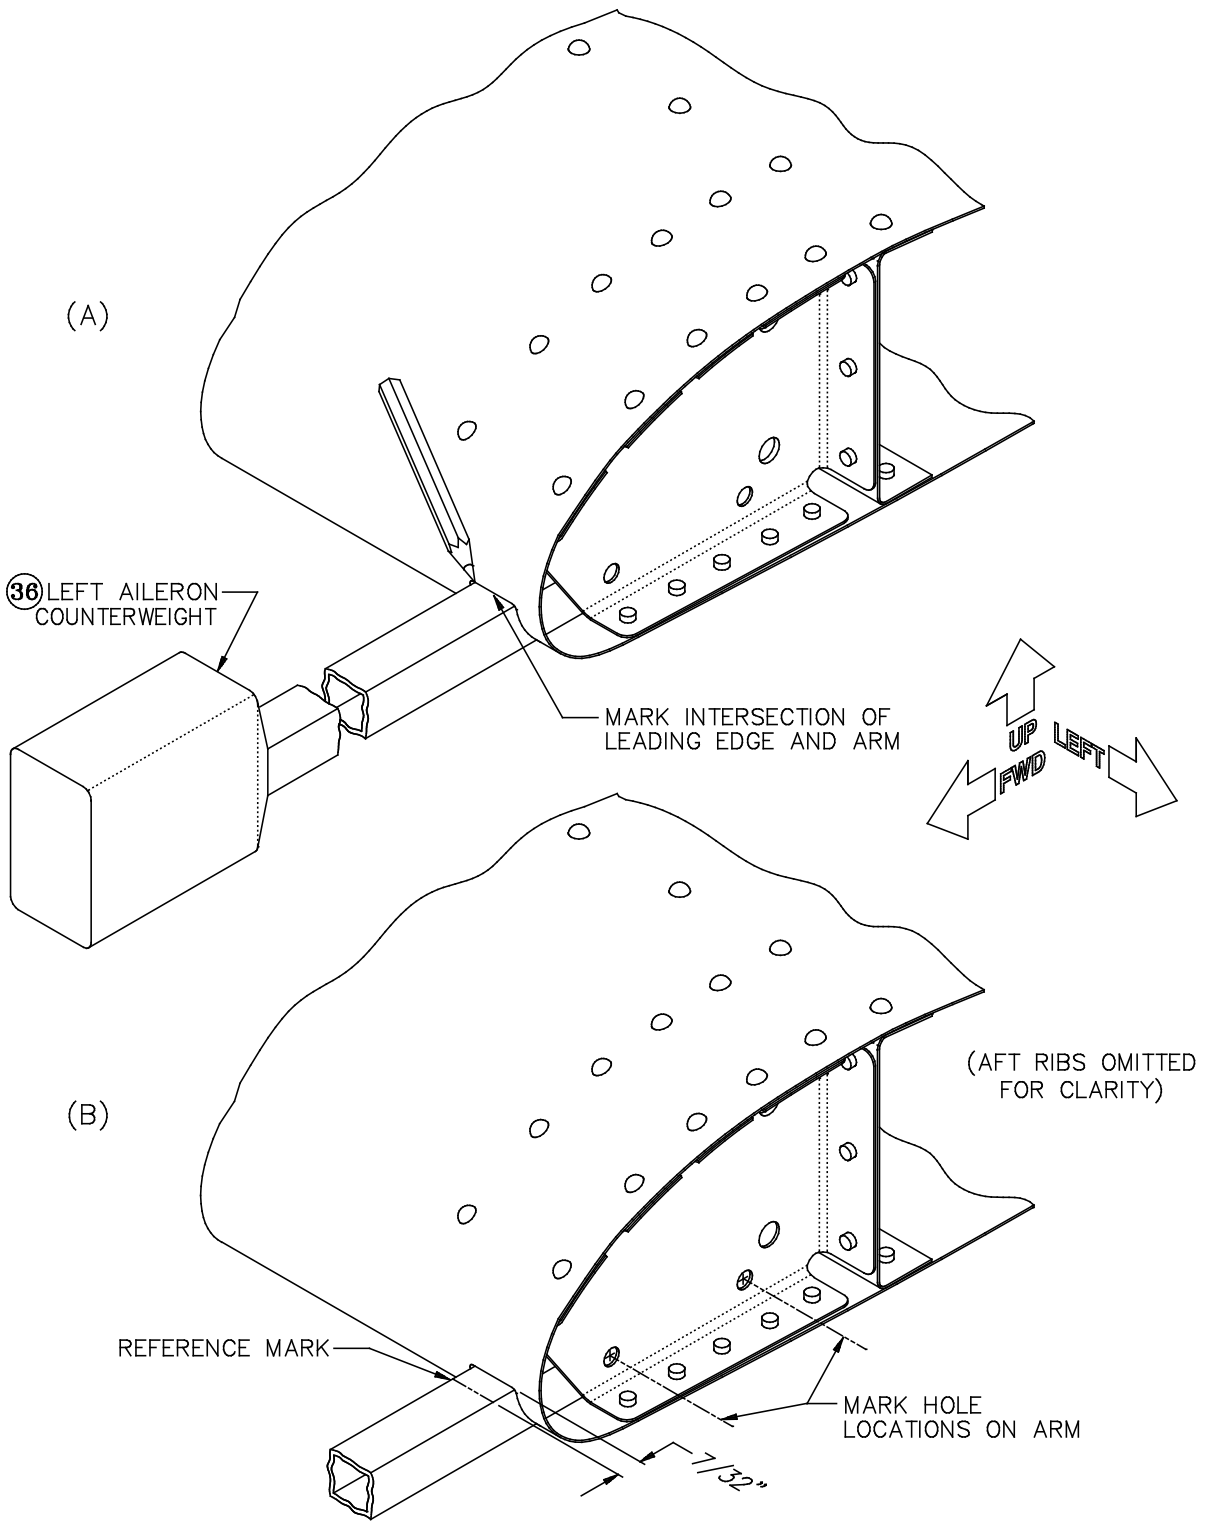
Drilling the Mounting Bolt Holes in the Counterweight Arms
